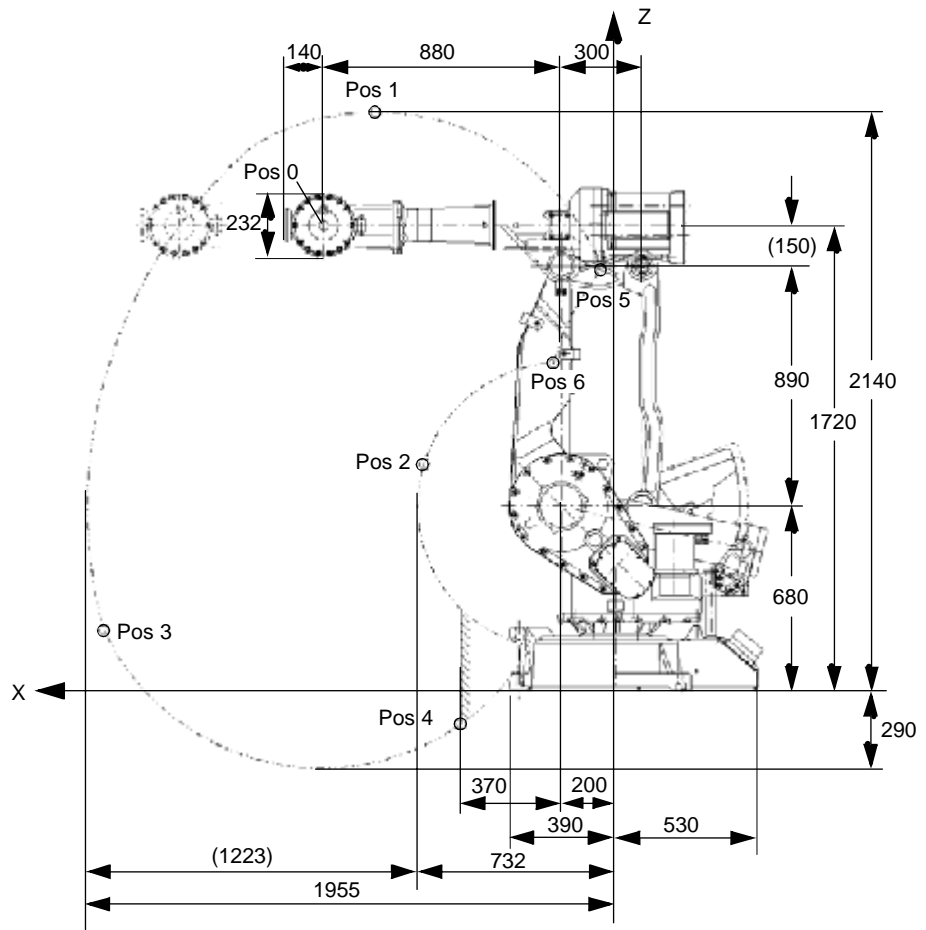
The extreme positions of the robot arm IRB 4400/45 and /60 (dimensions in mm).
